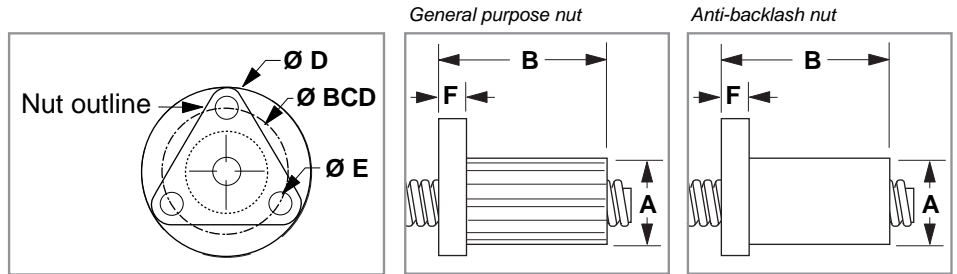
Linear Actuator nut specifications [inches (mm)]
